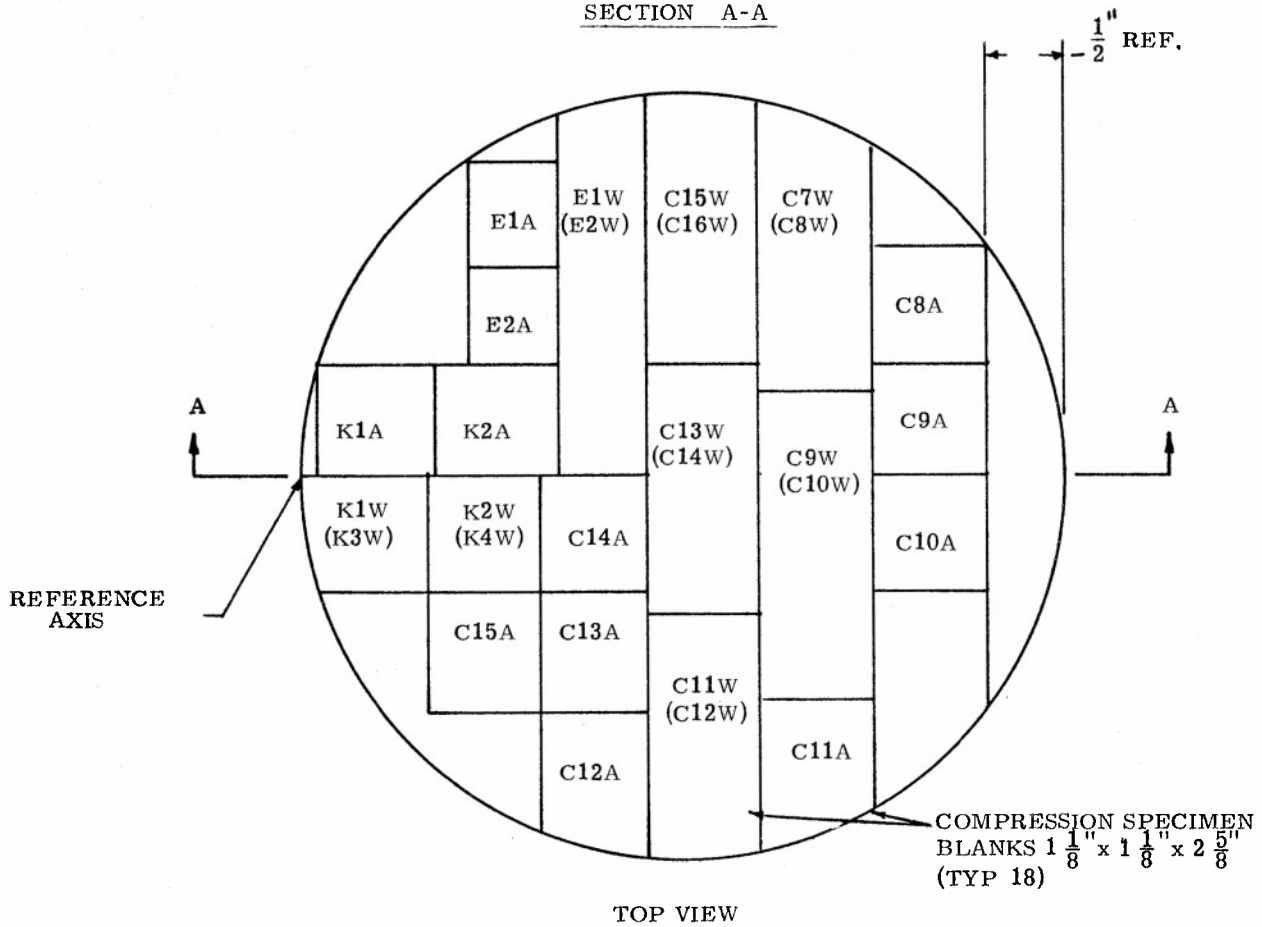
Cutting Plan for Slab 1 of Billet ATJ-S L-6-3
